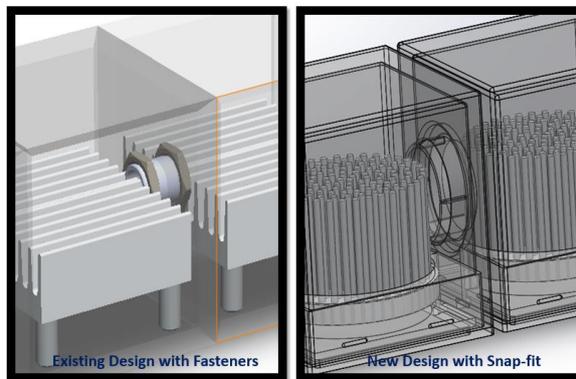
Connection-joints of prototype I (left) and prototype II (right).
